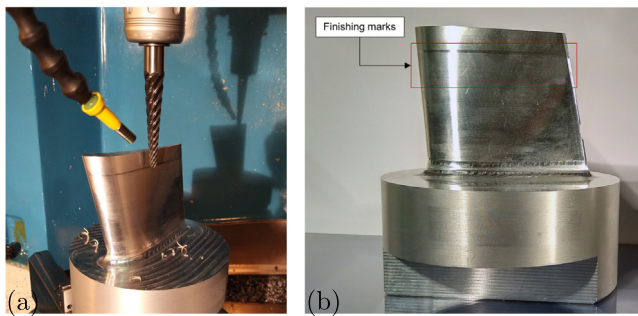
(a) Flank milling of a blisk blade using a conical cutter. (b) Imperfections of flank milling. The blade of the blisk has been finished by more than 20 paths with a conical tool, using a commercial software. Note the non-smooth light reflections and the horizontal artifact (red frame). Illustrations courtesy of [1]. (For interpretation of the references to color in this figure legend, the reader is referred to the web version of this article.)
